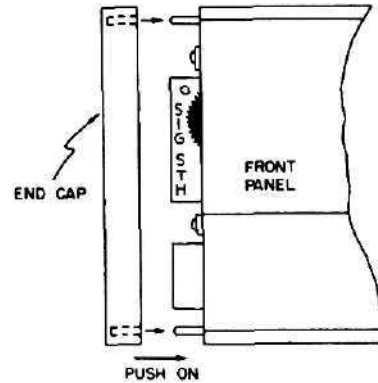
Detail of how the panel end caps are fitted to the MR-65 panel.
